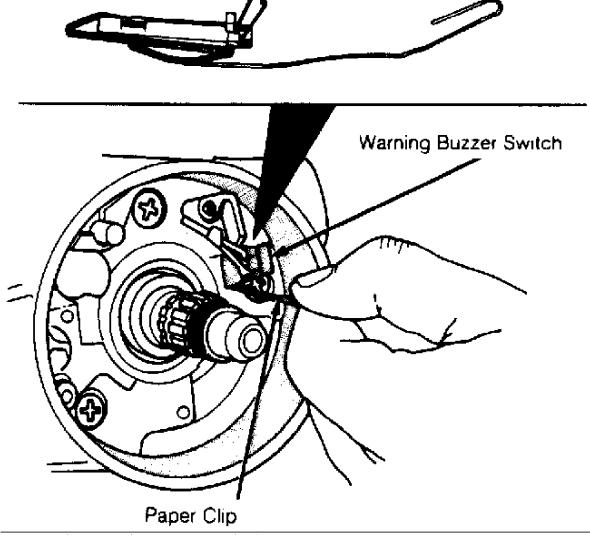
Removing Warning Buzzer Switch Courtesy of Chrysler Corp.
